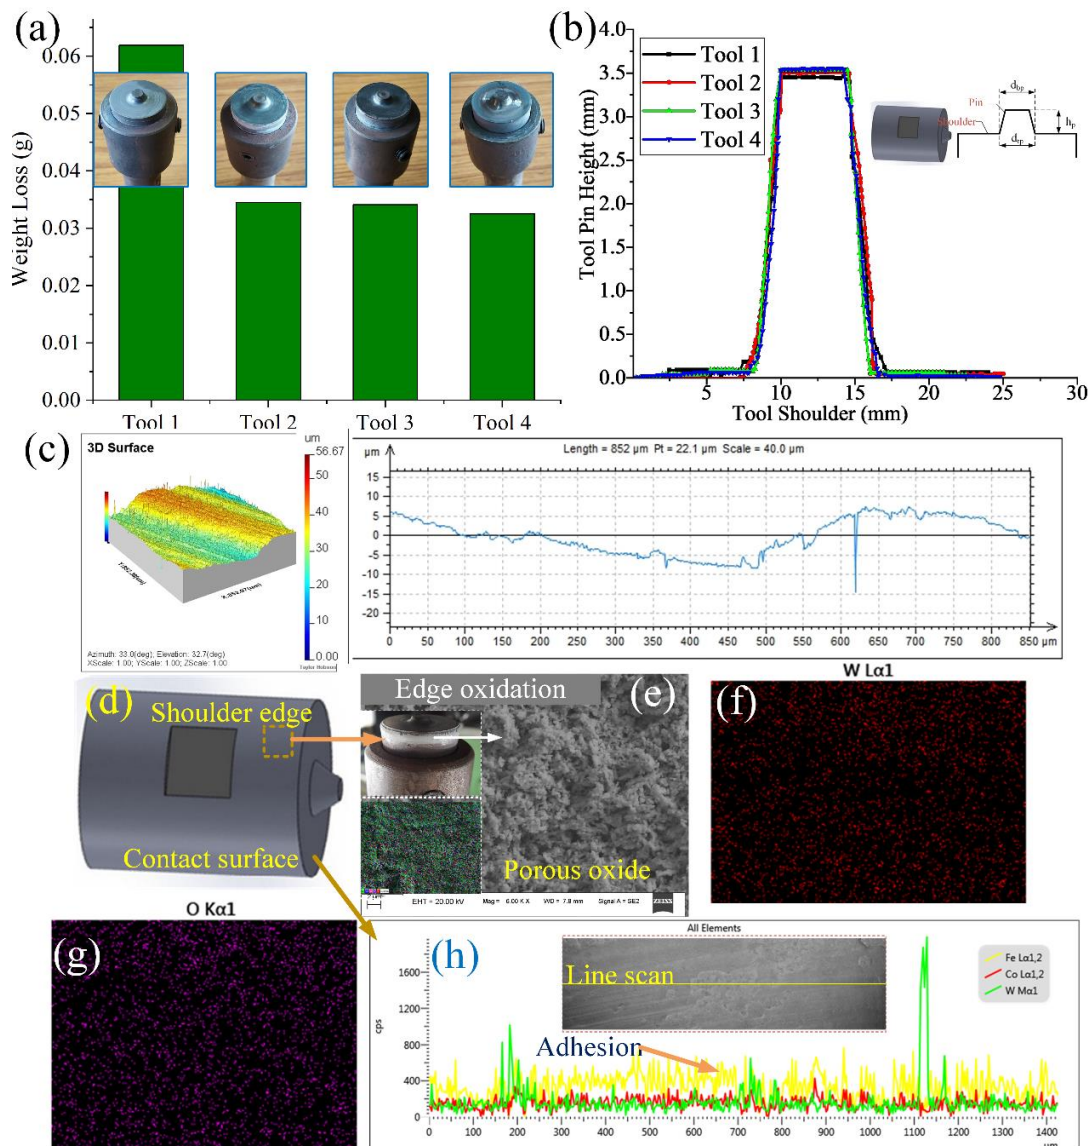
Macro characterization of tool: (a) comparison of weight loss, (b) FSW tool profiles (c) 3D surface and surface roughness ( $R_a$ ) at shoulder for tool 1 (d) tool illustration showing shoulder contact edge and contact surface (e-h) FESEM and EDS analysis showing edge oxidation, and (h) EDS line scan reflecting Fe adhesion on the shoulder contact surface
